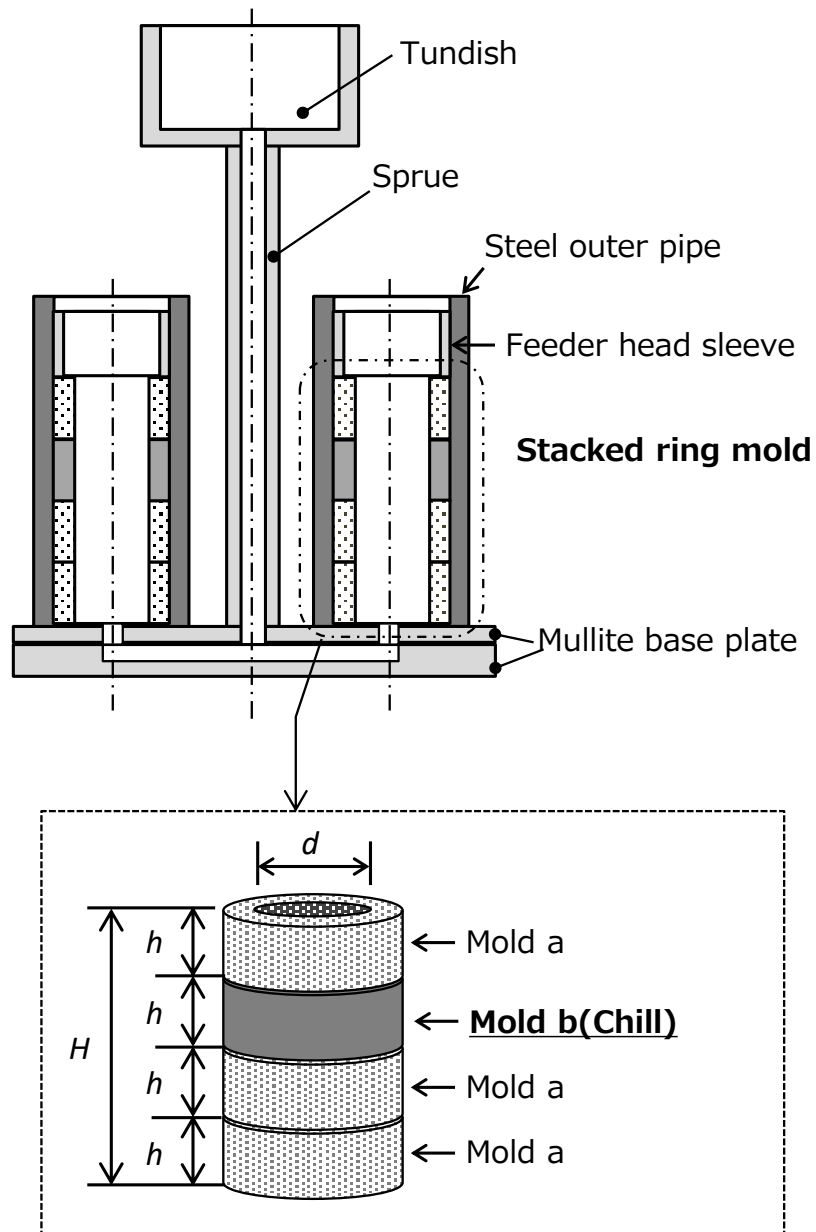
Schematic drawing of bottom pouring method and experimental mold.
